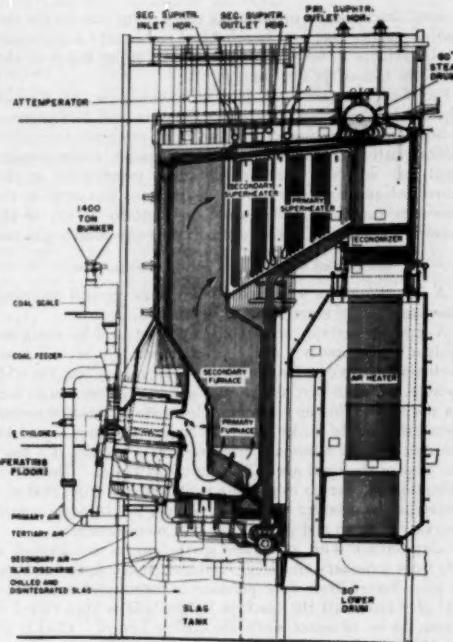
UNITS NOS. 1 AND 2, RIDGELAND STATION, SECTIONAL SIDE VIEW OF BOILER UNIT
